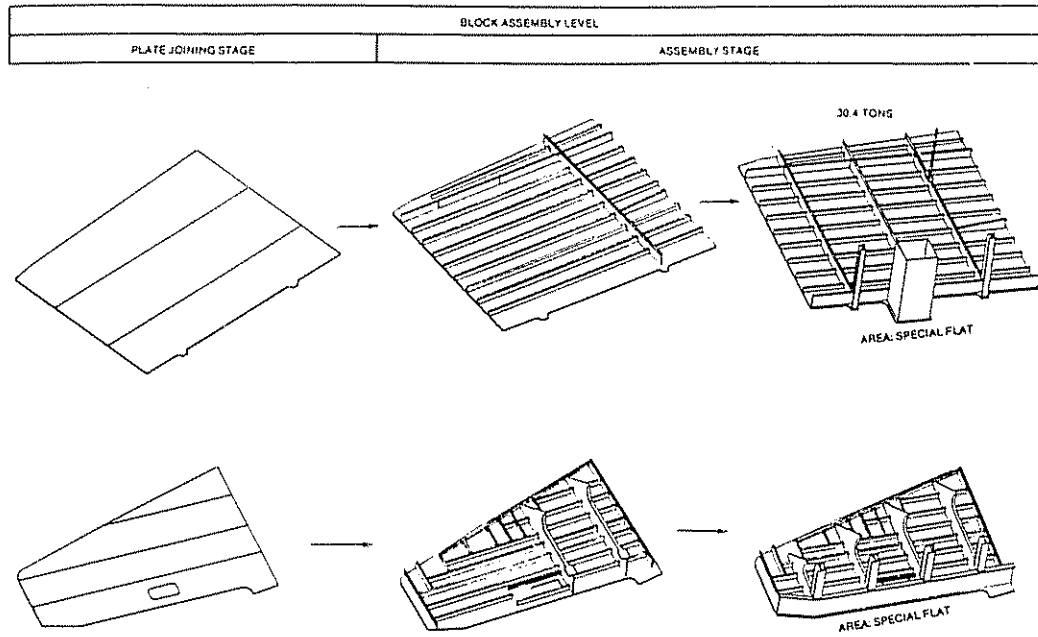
Block assembly, showing an upper deck and an engine room flat
